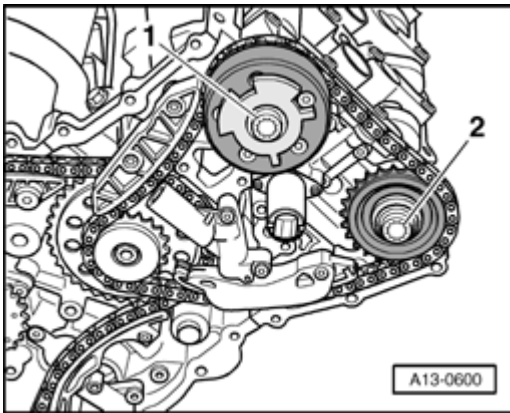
Removing/Installing Bolts For Camshaft Chain Sprocket Or Camshaft Adjuster Using Multipoint Socket T10035
